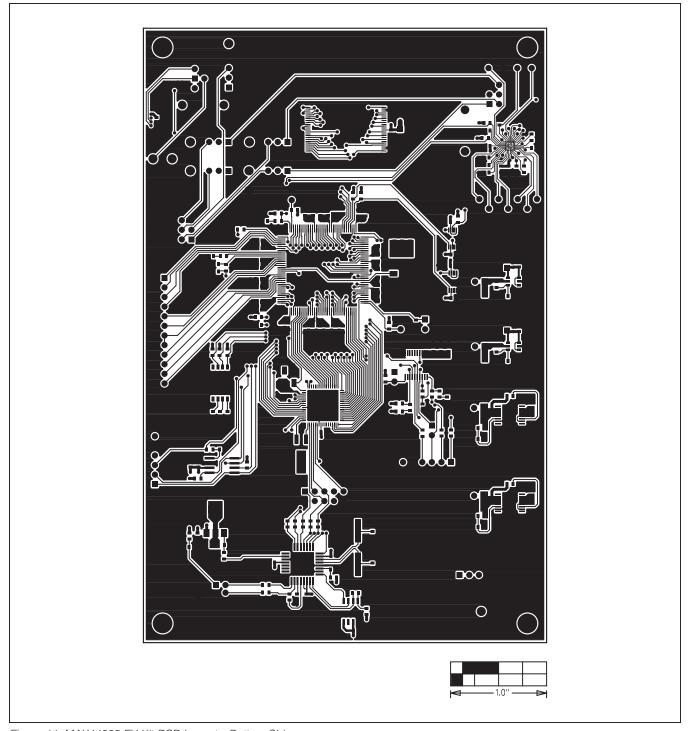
MAX44005 EV Kit PCB Layout—Bottom Side
